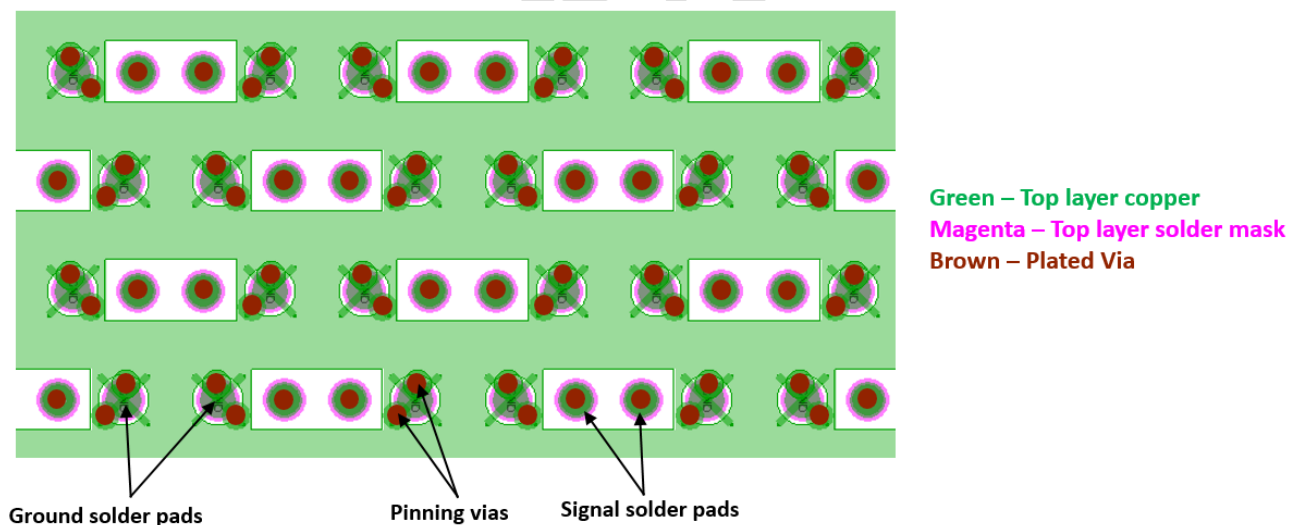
Example of via-in-pads showing top layer copper and its solder mask
